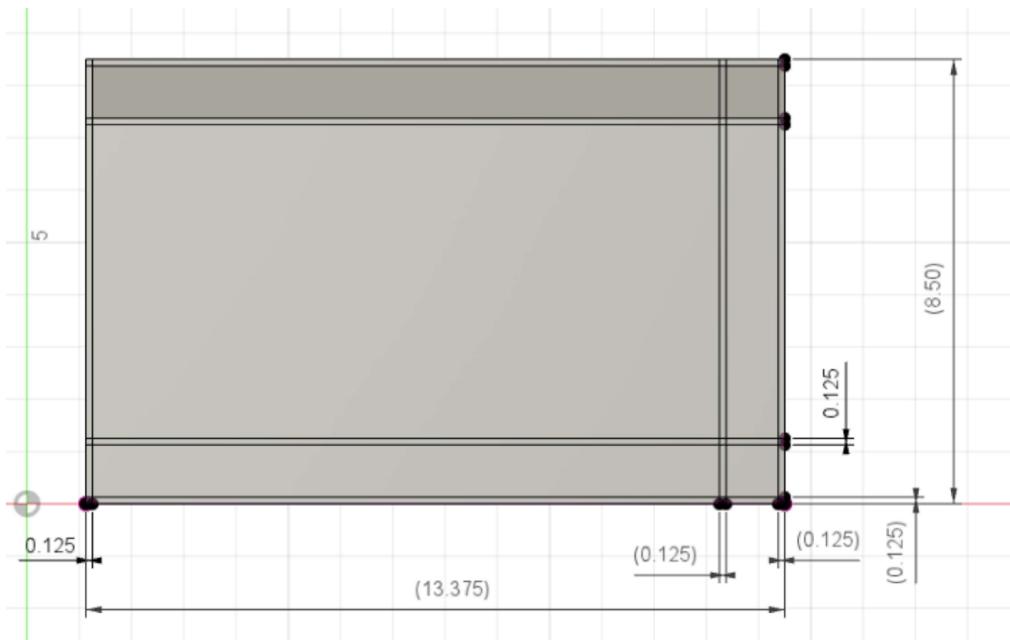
Side View Dimensions of Reflow Oven. (Units: Inches)
